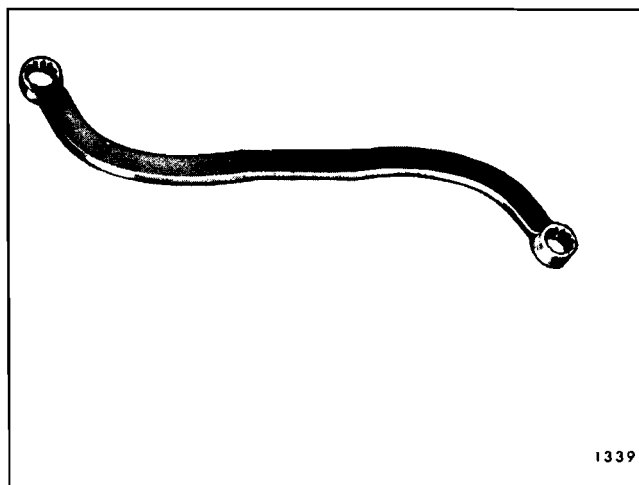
Front Door Hinge Tool J-21550 (1/2" Box) - "F, X & Z" Styles
